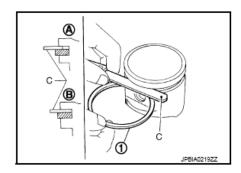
Measuring Side Clearance Of Piston Ring And Piston Ring Groove Using Feeler Gauge Courtesy of NISSAN NORTH AMERICA, INC.
